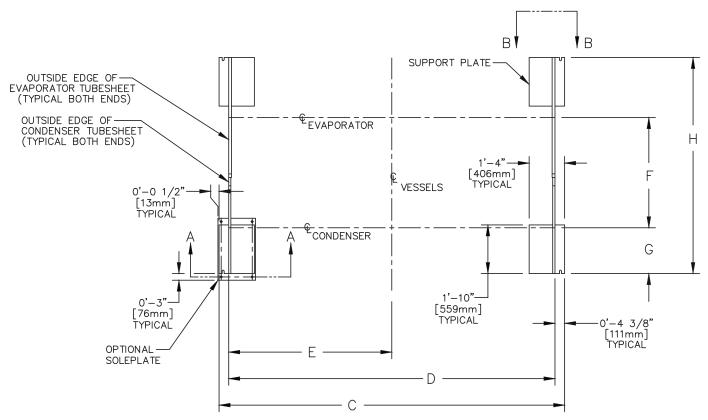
19DV, Bottom View (DV4 Shown)
